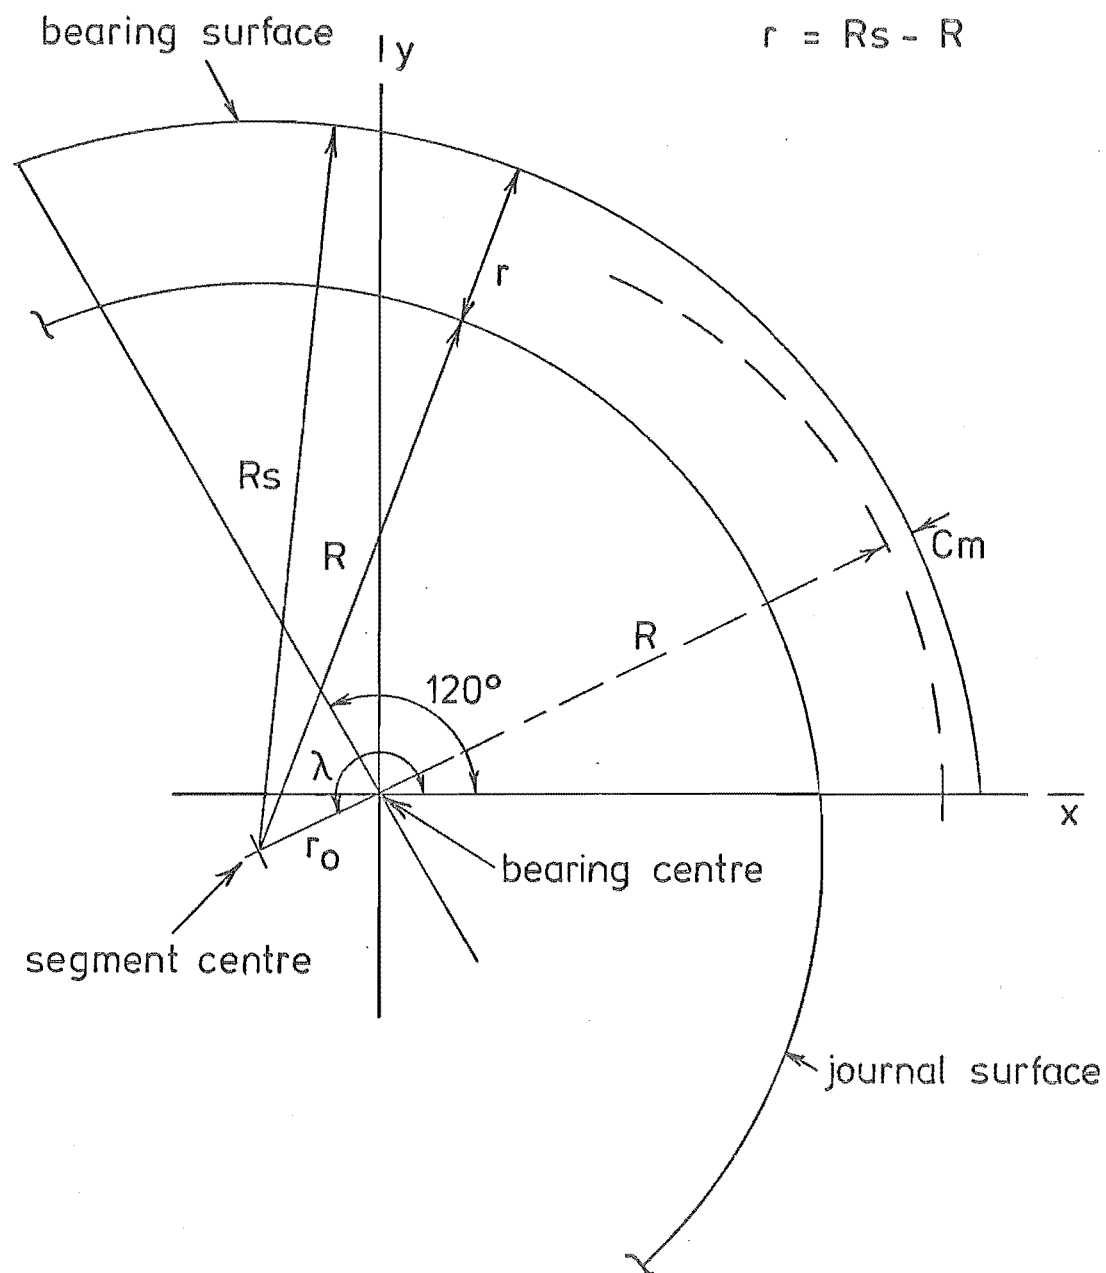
DEFINITION OF BEARING CROSS-SECTION GEOMETRY. FIRST SEGMENT SHOWN OF A THREE SEGMENT BEARING.
